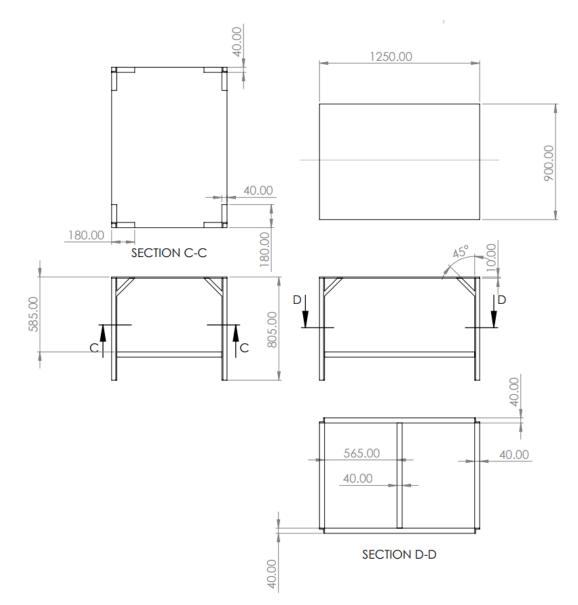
Technical drawing of the manipulator bench, present at LARCCell.
